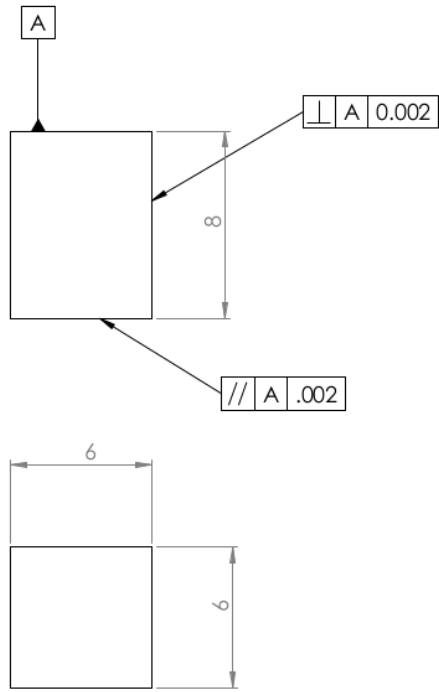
Dimensions and tolerances of compressive specimen.
